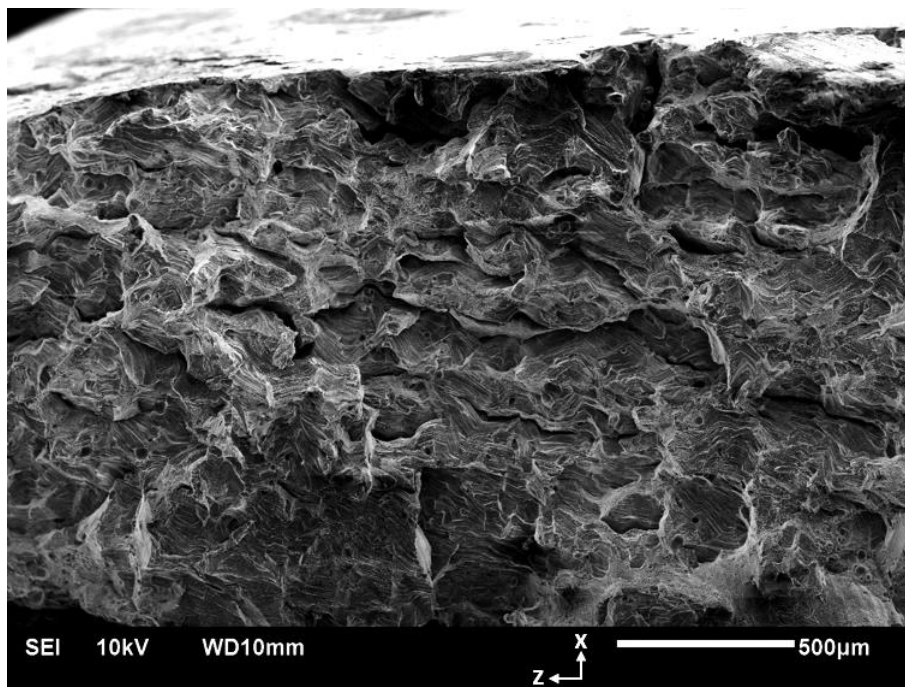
Fracture surface of AA6061 sample 14 from test A3 produced with 50 μ m layer thickness.
